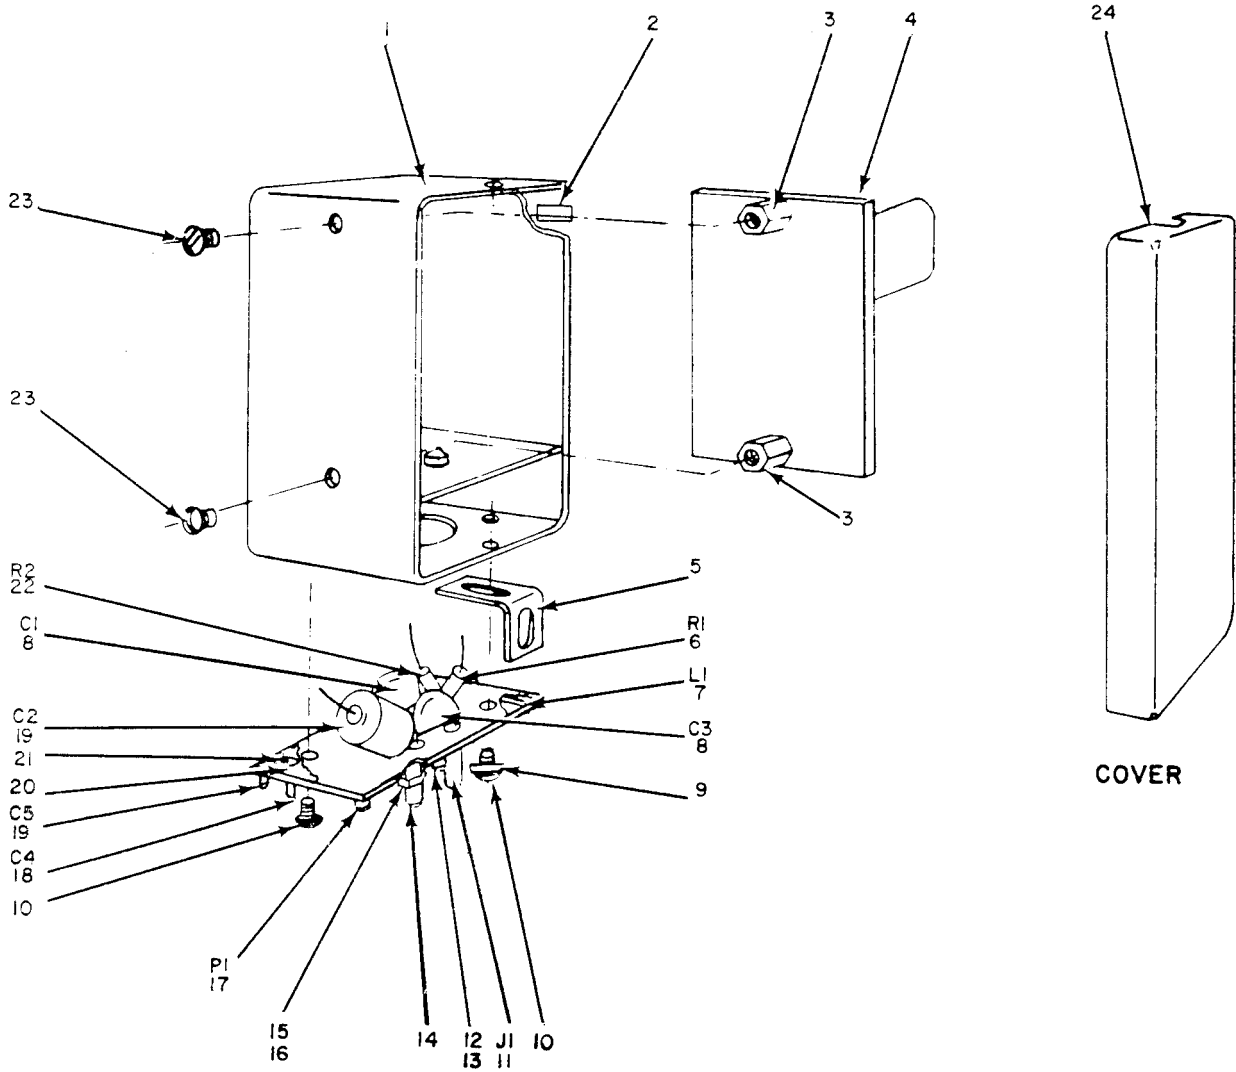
Amplifier Marker Assembly (A4A7) (Sheet 1 of 2).
